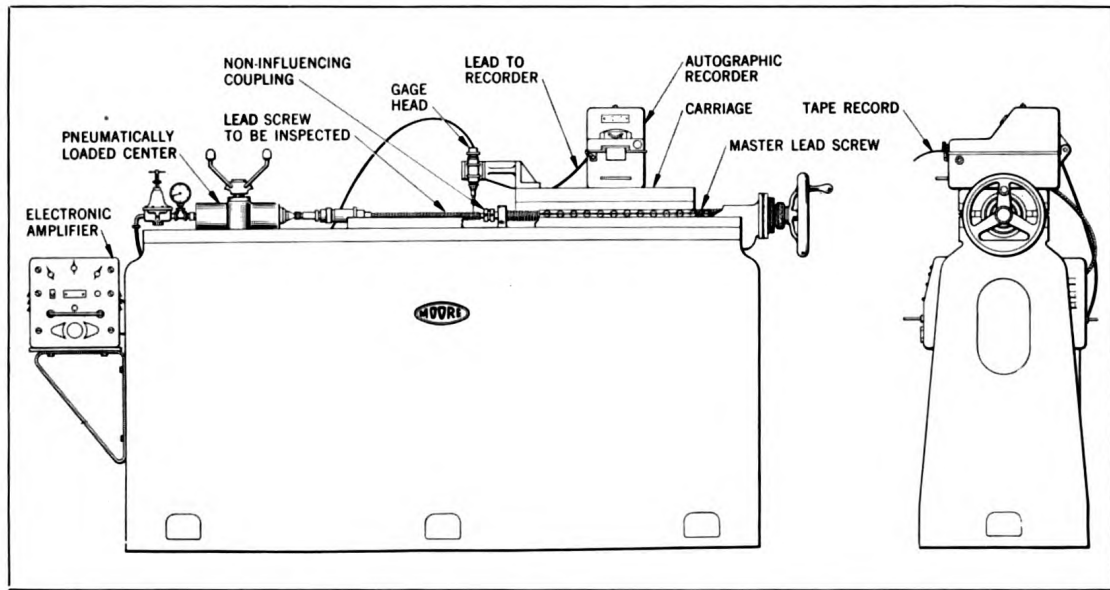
Construction principles of the Moore Lead Measuring Machine.
